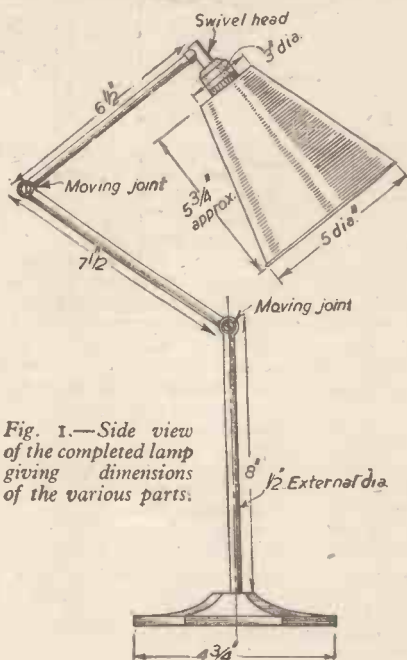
Side view of the completed lamp giving dimensions of the various parts.
